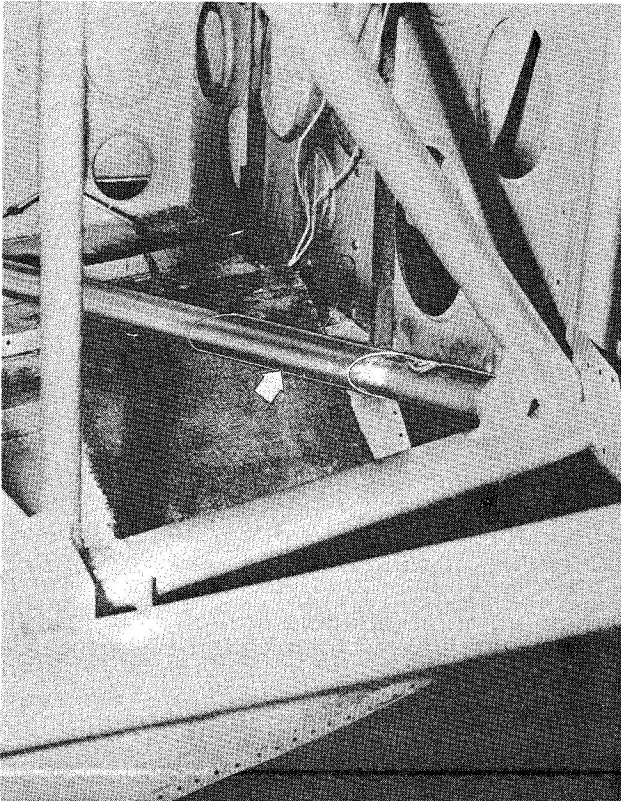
Alternate Welding, 45B-3-44
